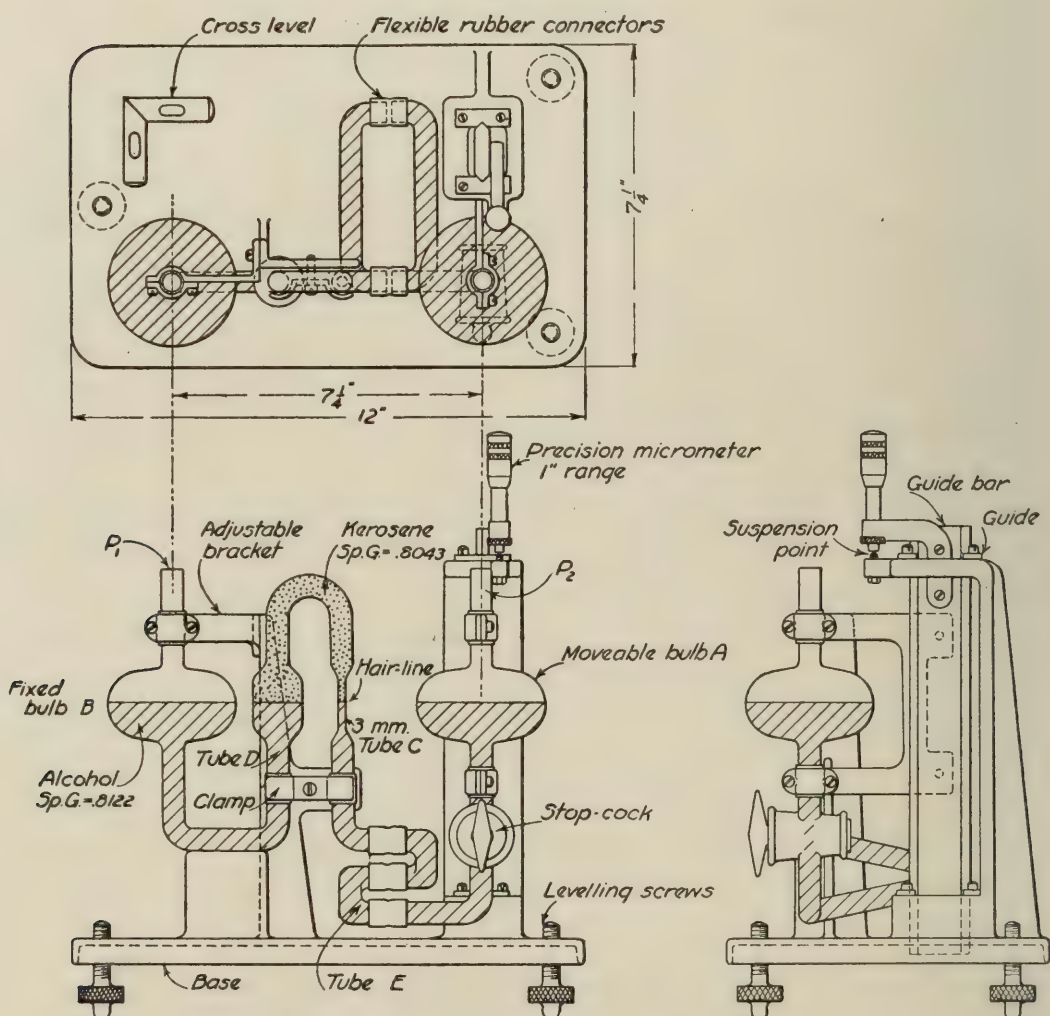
PLAN AND ELEVATIONS OF WAHLEN GAGE
